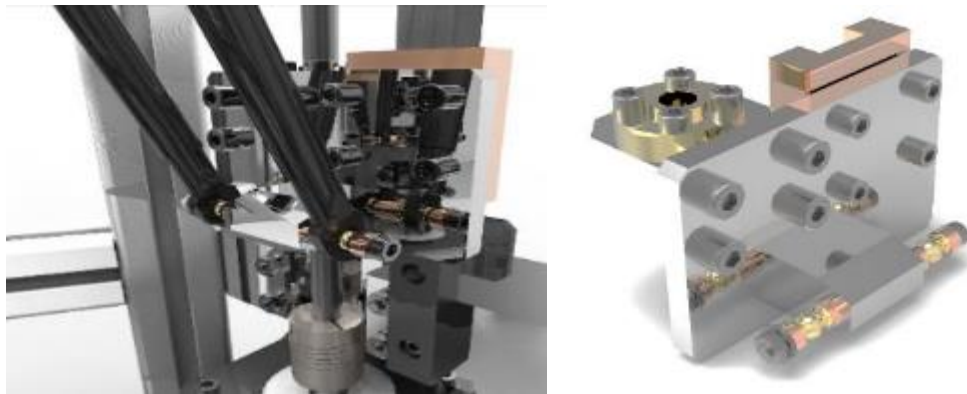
Guiding intermediate sub-assembly marks as n. 5 in the 3D stage assembly
